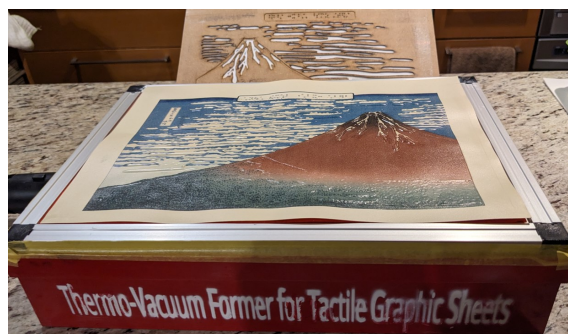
DIY thermal vacuum former design and assembled in this project. The box provides vacuum and the MDF sheet in the back is the master. The color-printed tactile Braille is shown on the vacuum box.
